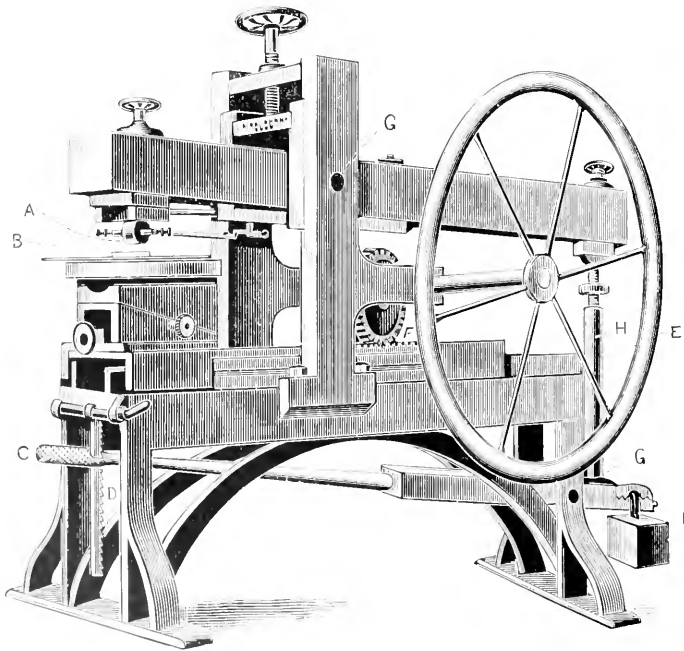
TRANSFER PRESS. A, Roll in carrier; B, die or bed piece; C, foot lever; D, rack to fasten lever down; E, side wheel by which bed of press is moved back and forth; F, rack and pinion connecting them; G, G, fulcrum pins of upper and lower levers; H, connecting rod between two levers; I, counter balance.
